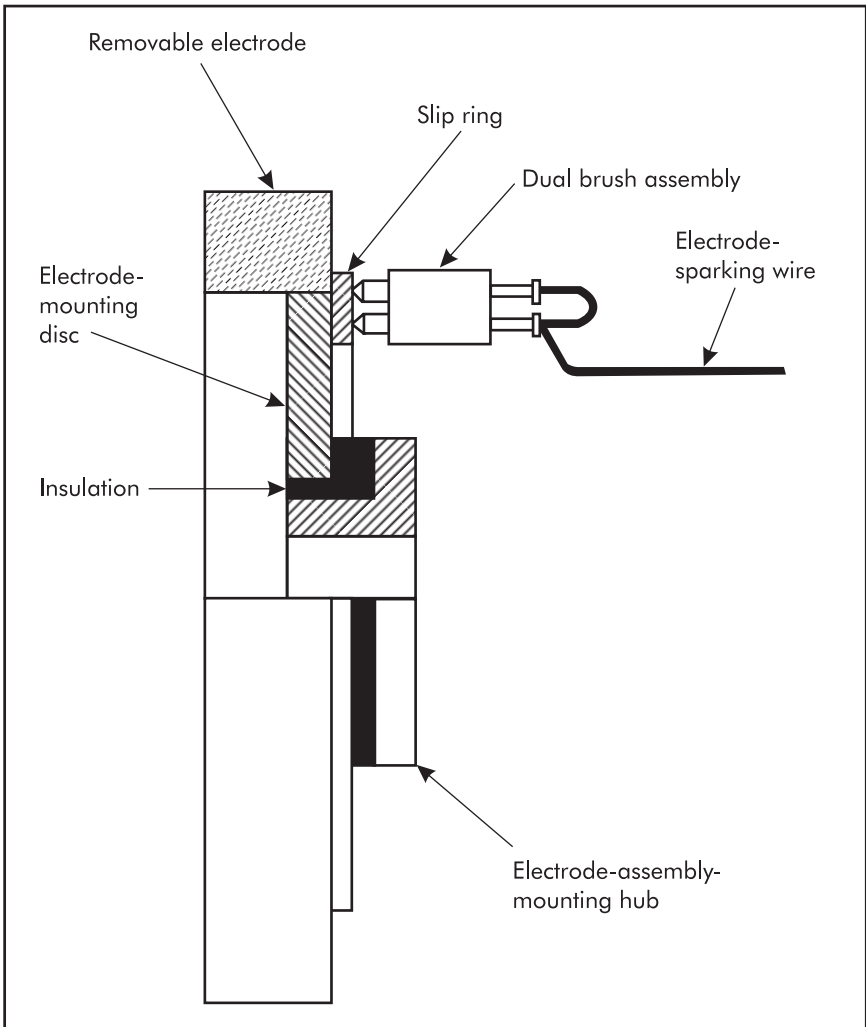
Insulated mounting disc isolates electrode from machine.
